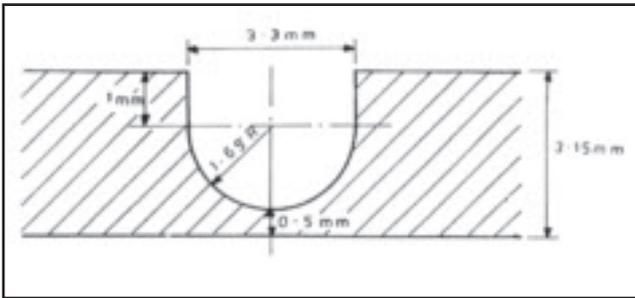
Dimensions of U-groove used for welding.
